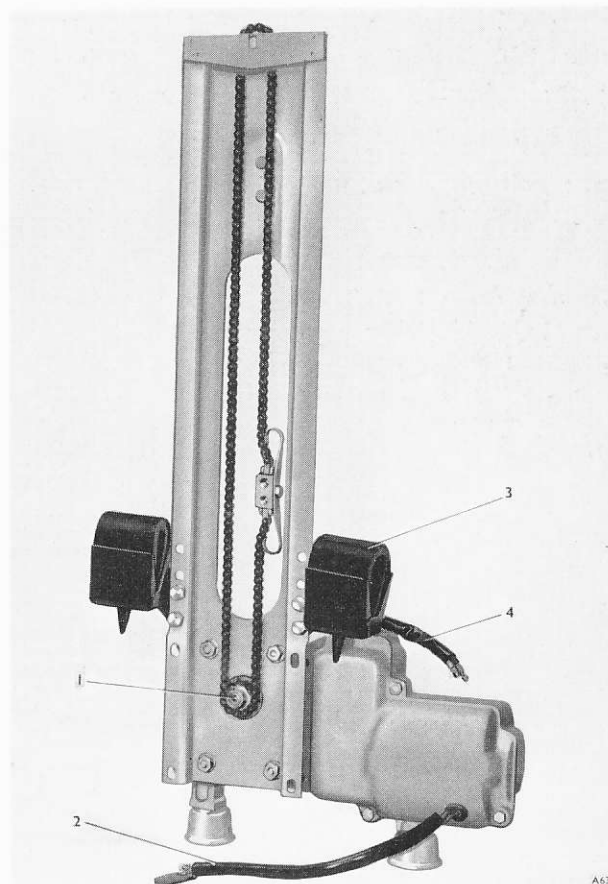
Reverse side of motor and mechanism assembly for left-hand rear door
